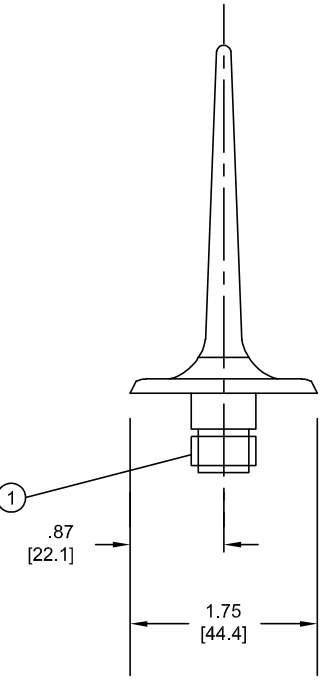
TRE-930 L-Band Antenna, Outline and Mounting Dimensions
